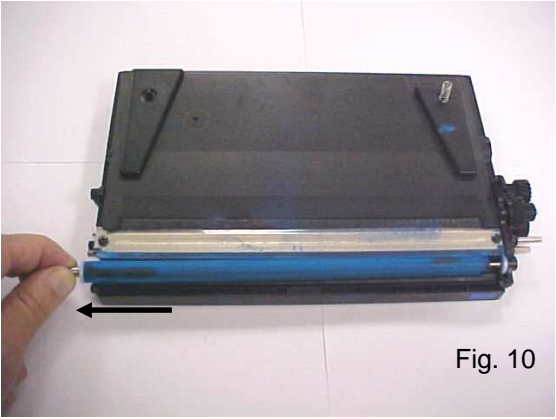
Remove the developer roller by lifting the left side out of the saddle block and pulling the right side out of the gear side support plate.
